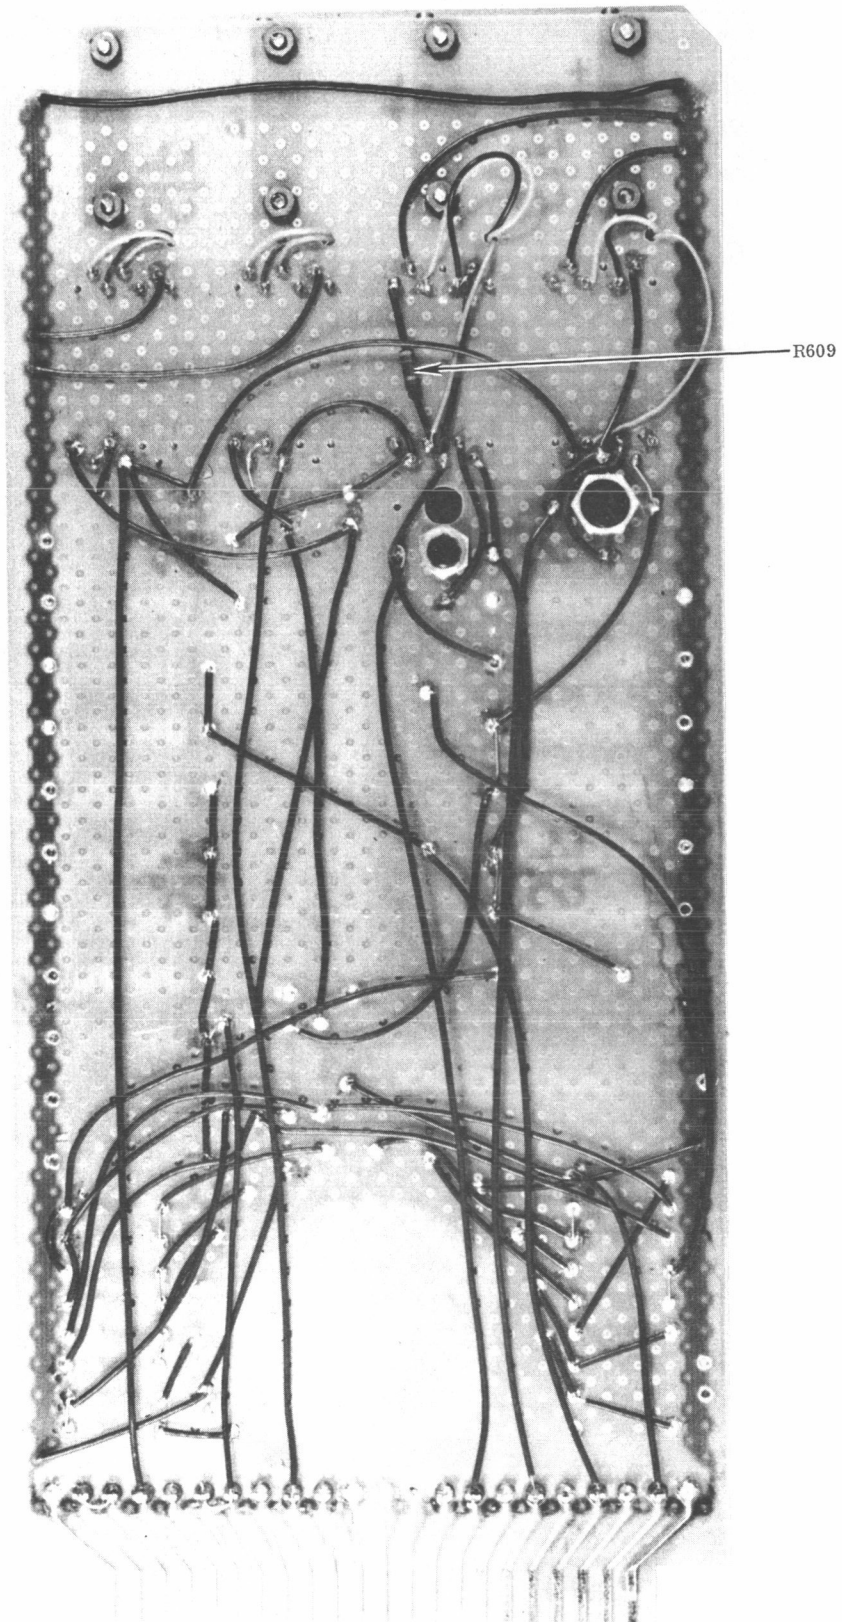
Bottom View Board 6 Low Voltage Power Supply
